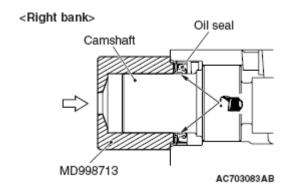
Fitting Camshaft Oil Seal Using Special Tools MD998713 And MD998777 - Right Bank
